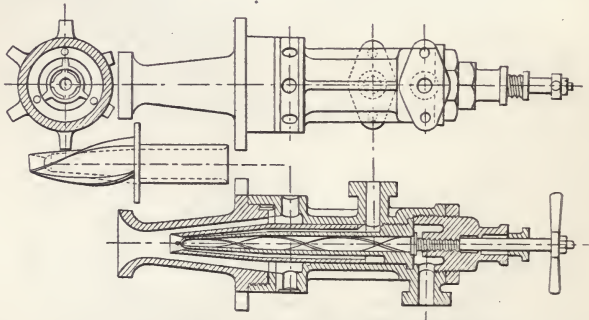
KERMODE STEAM AND INDUCED AIR BURNER.
